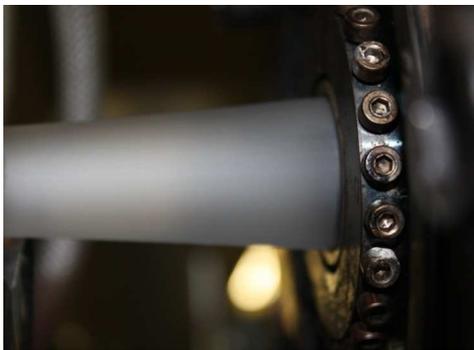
Tube die with radially arranged screws to optimize the flow channel gap between the Flex Ring sleeve and the mandrel in order to reduce the thickness tolerances in the tube
